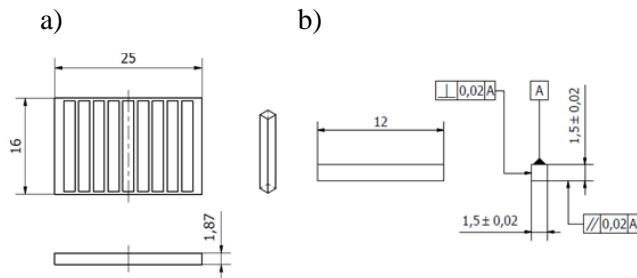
a) Blank cutting; b) Blank geometry and dimensions.
